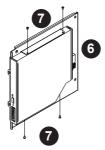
Installing the Lower Bracket onto the DVD-ROM Drive
